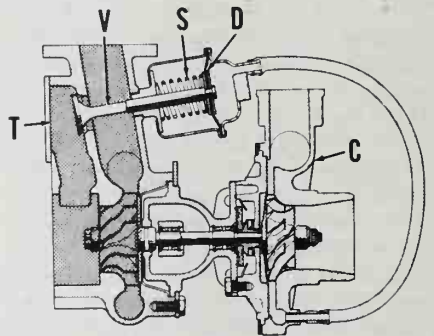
Cross-sectional view of turbocharger and wastegate used on Models XD2PS and XD2PT.
